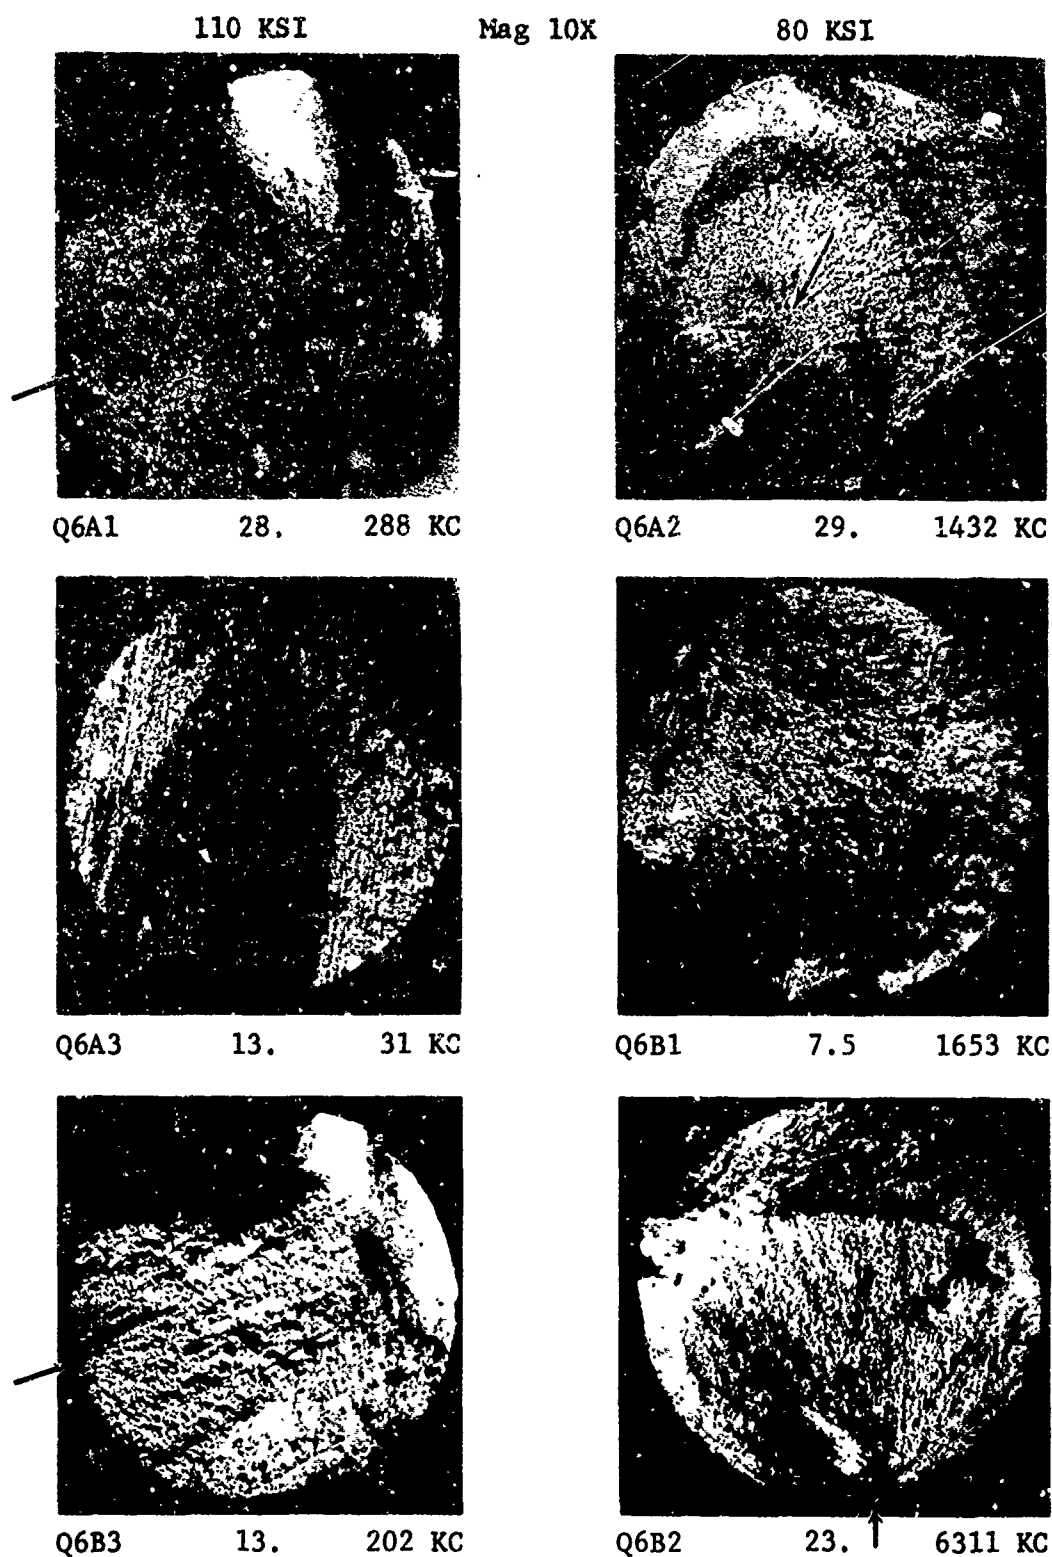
Fracture Surfaces of Failed Fatigue Specimens Series Q6-Multiple-Bond/3-Axis Diffusion Bonded with ASTM Grain Size No. 8
